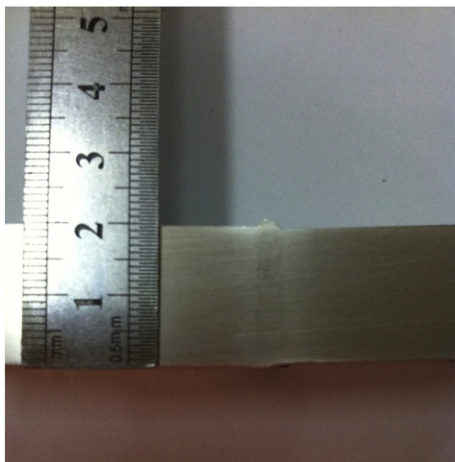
Macroscopic schematic diagram of welded joints.
